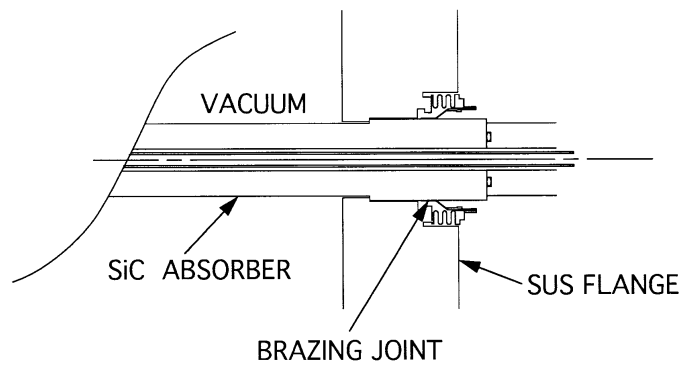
Next prototype of the SiC absorber using a brazing joint. The SiC ceramics is directly brazed to the copper sleeve.
